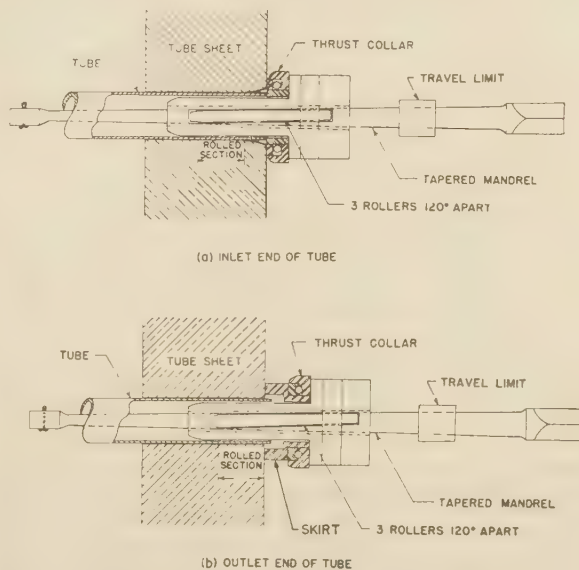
ASSEMBLIES OF EXPANDING TOOL FOR EXPANSION OF INLET END AND OUTLET END OF TUBE
